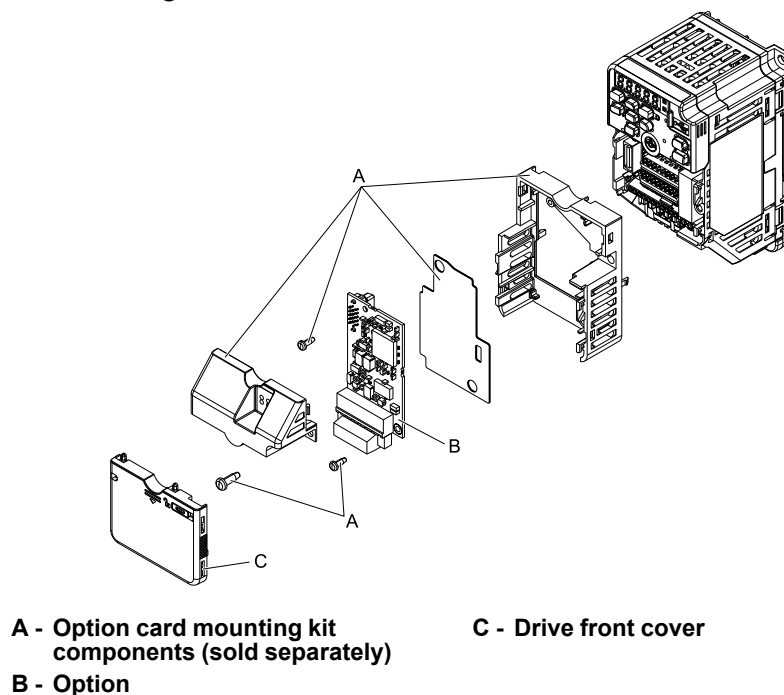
Option Card Mounting Kit (JOHB-GA50)
